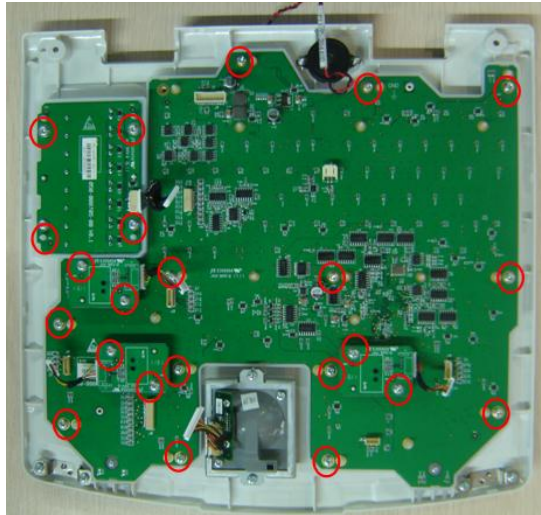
Disassembly of Control Panel and Silicon Rubber Keypad (3)
